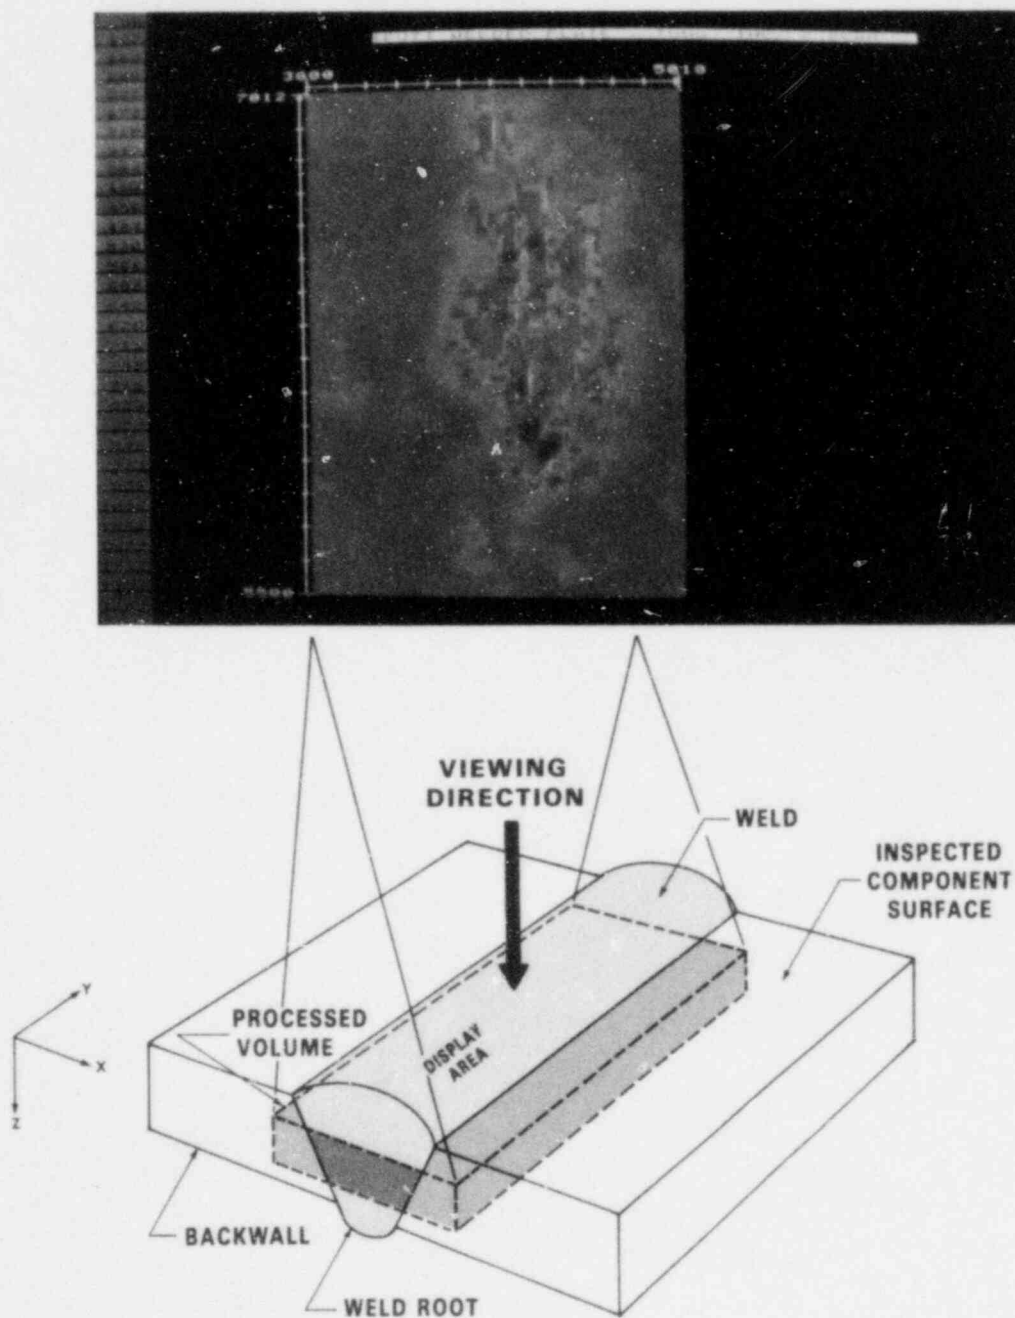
BUTT-WELDED CARBON STEEL PLATE SPECIMEN - HEAT-AFFECTED ZONE-TO-BASE METAL CRACKING (C-Scan View)
